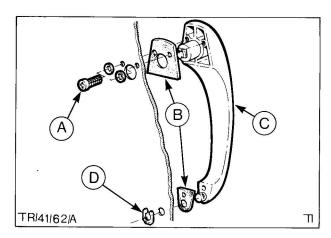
Sliding door exterior handle assembly A – Screw and washer C – Handle B – Mounting pads D – Circlip
